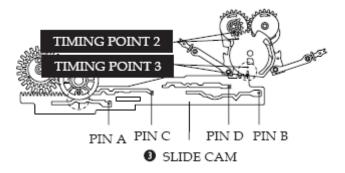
Gear Loading Drive, Slider Cam, Ass'y Lever Load S, T Assembly
